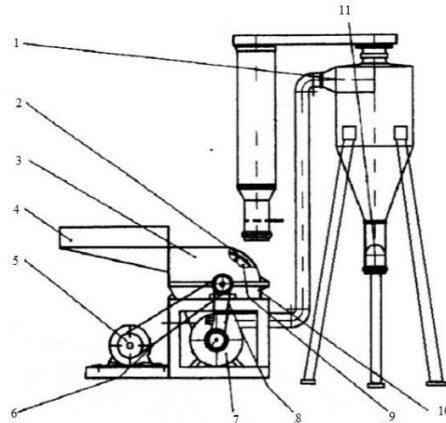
Hammer mill MC-22 constructive schema [10]
